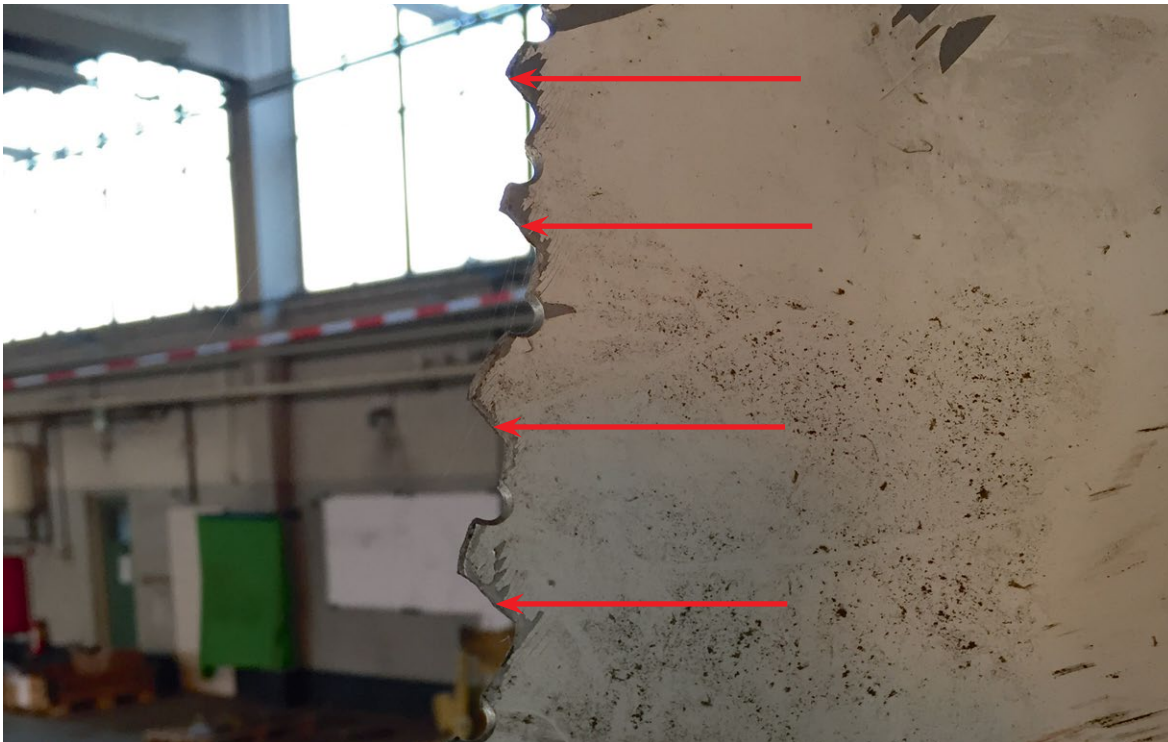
Typical failure under tension and shear, cracks link-up between fastener holes after growing along an angle. Continuation of crack under angle away from fastener row indicates direction of crack growth downward. (Source: Dutch Safety Board)
